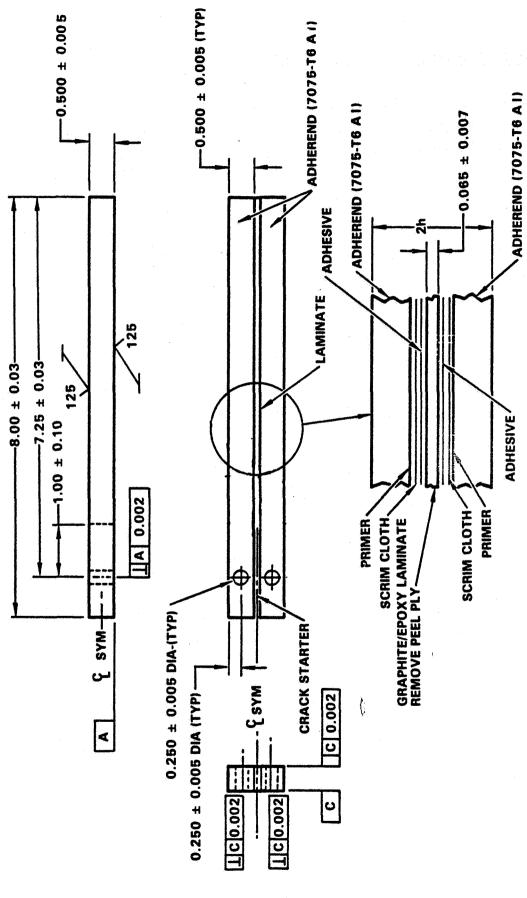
Double Cantilevered Beam (DCB) Test Specimen
